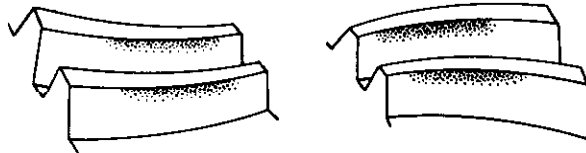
High Tooth Contact—To Correct Move Pinion Toward Gear
